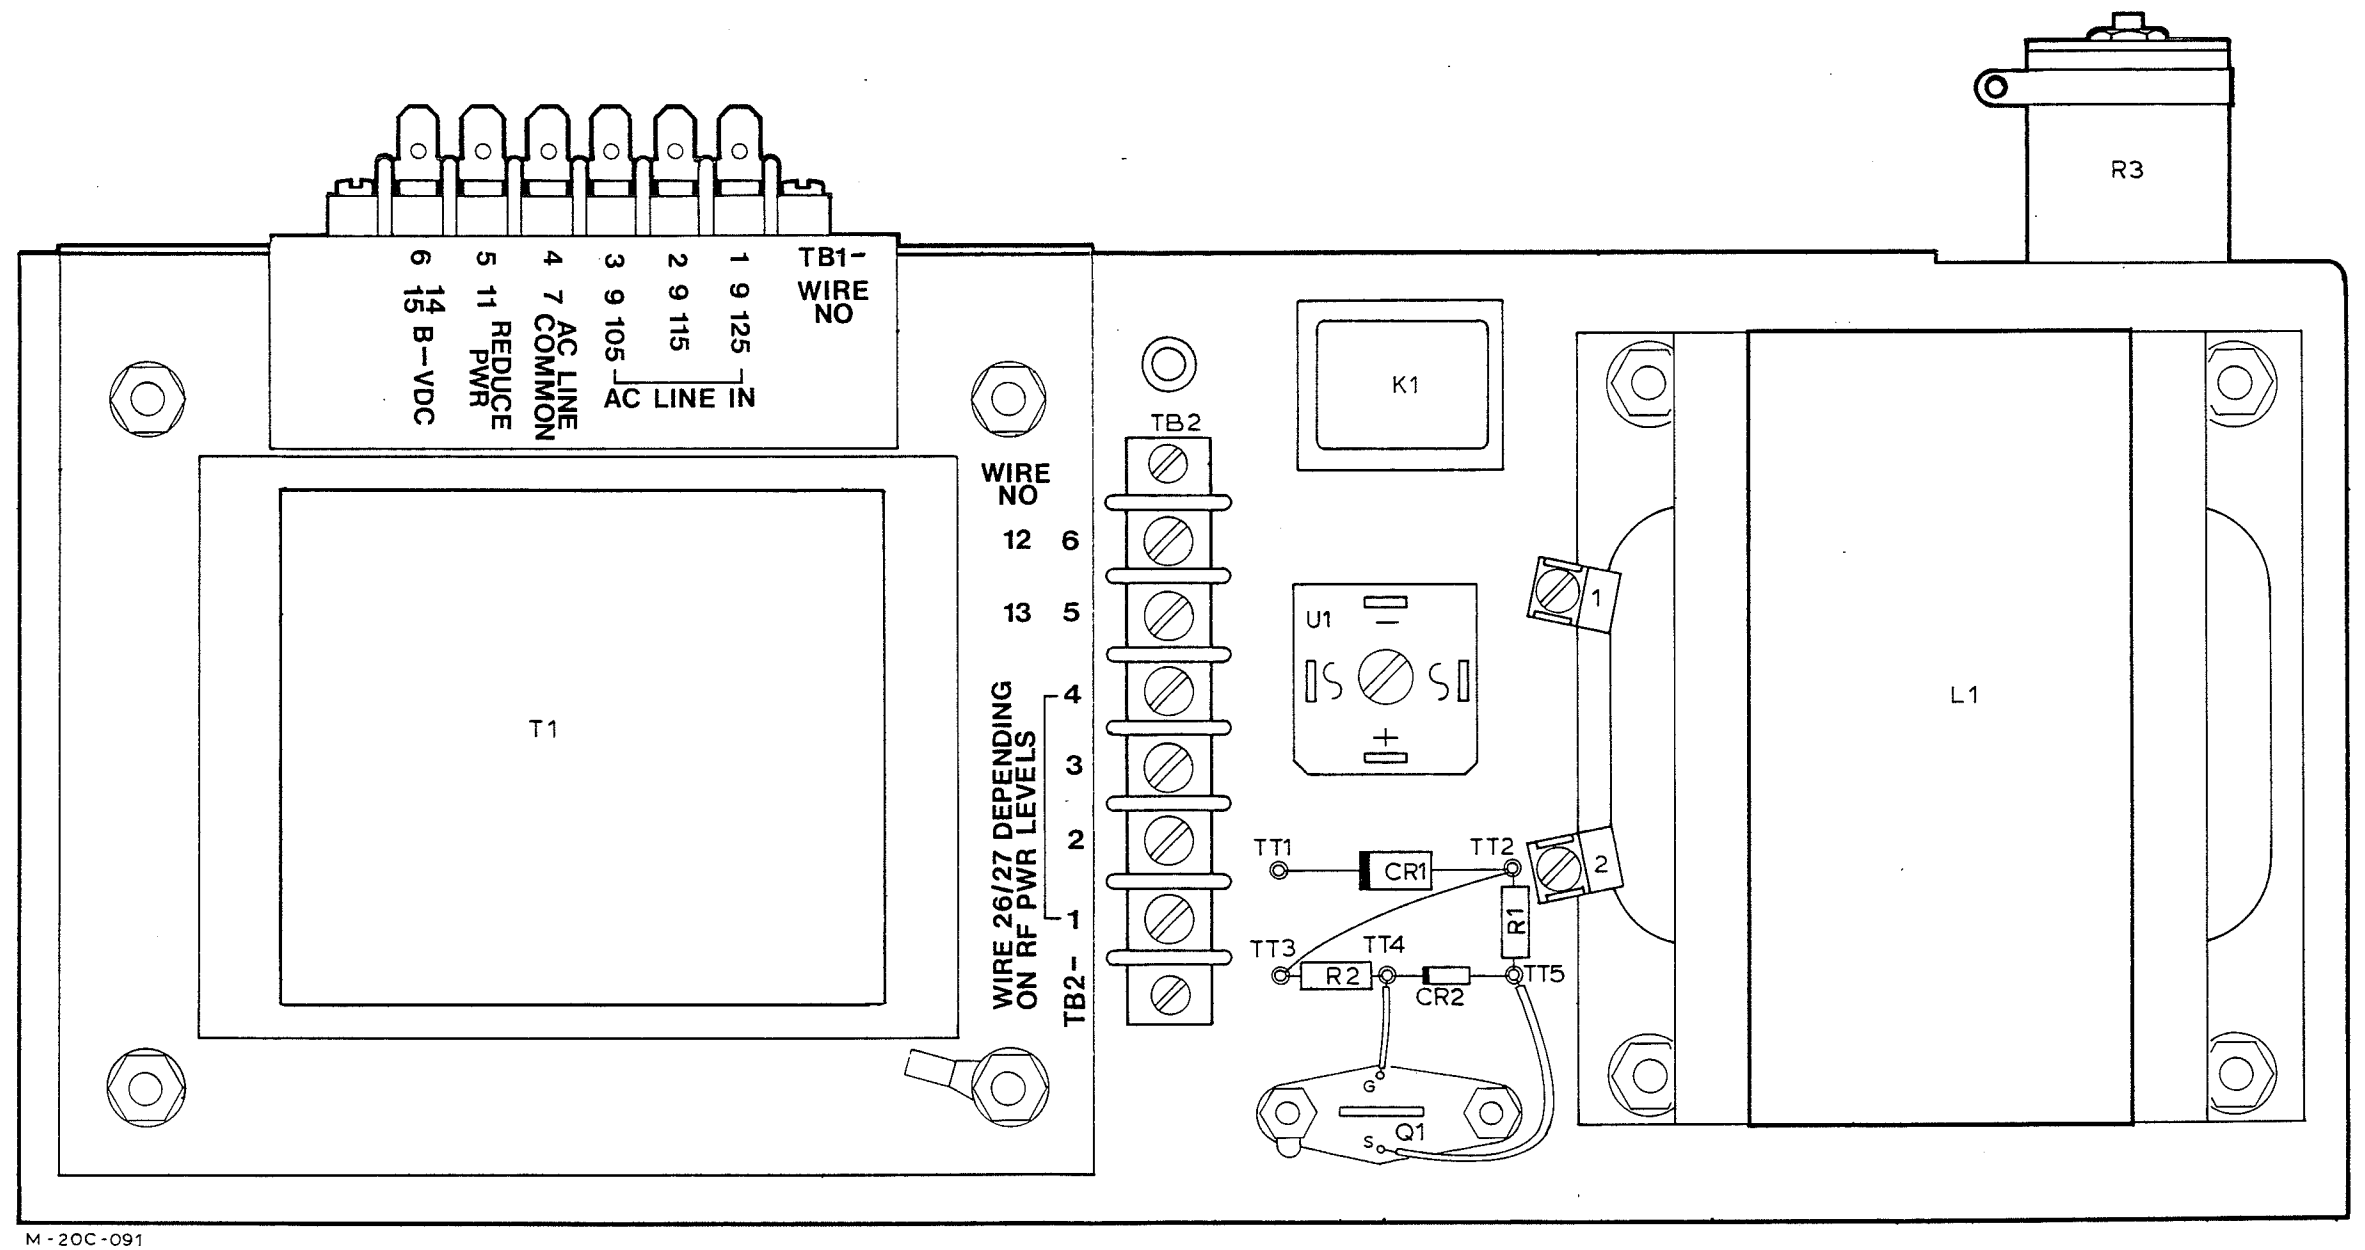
Assembly Detail - NAS17 PA Power Supply Assembly (Side 1)
